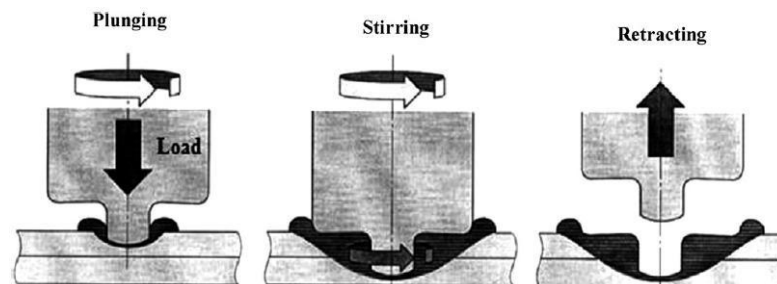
A schematic illustration of the spot friction welding process [32]
